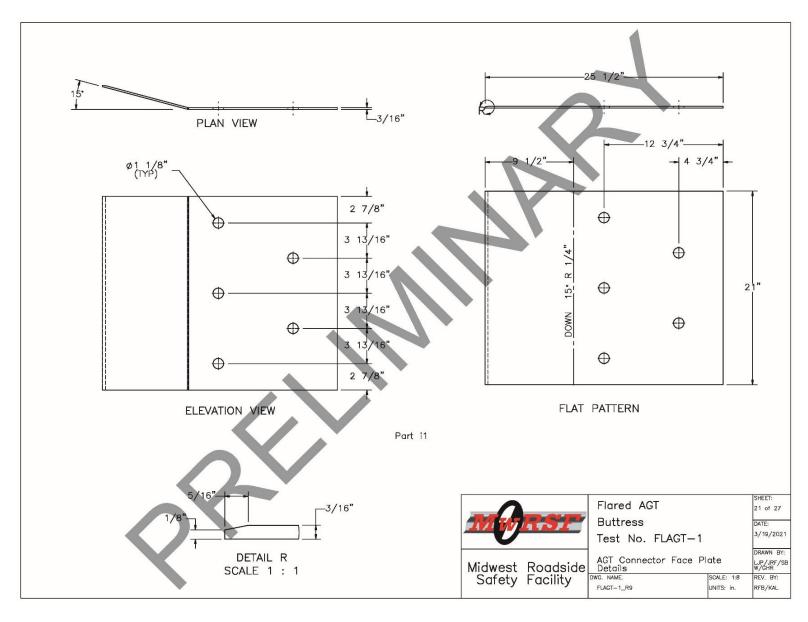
AGT Connector Plate Assembly Face Plate Details, Test No. FLAGT-1
